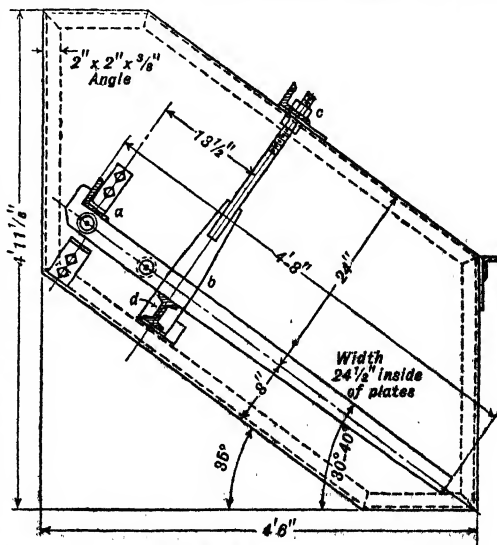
Cantilever grizzly (Allis-Chalmers Mfg. Co.).
